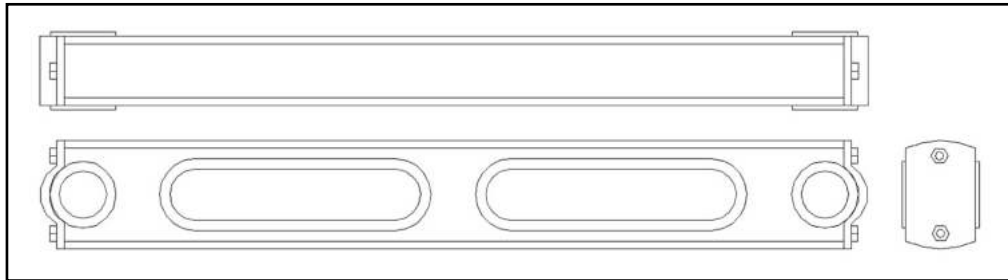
Side, top, and end views of the reconstructed connecting rod.
